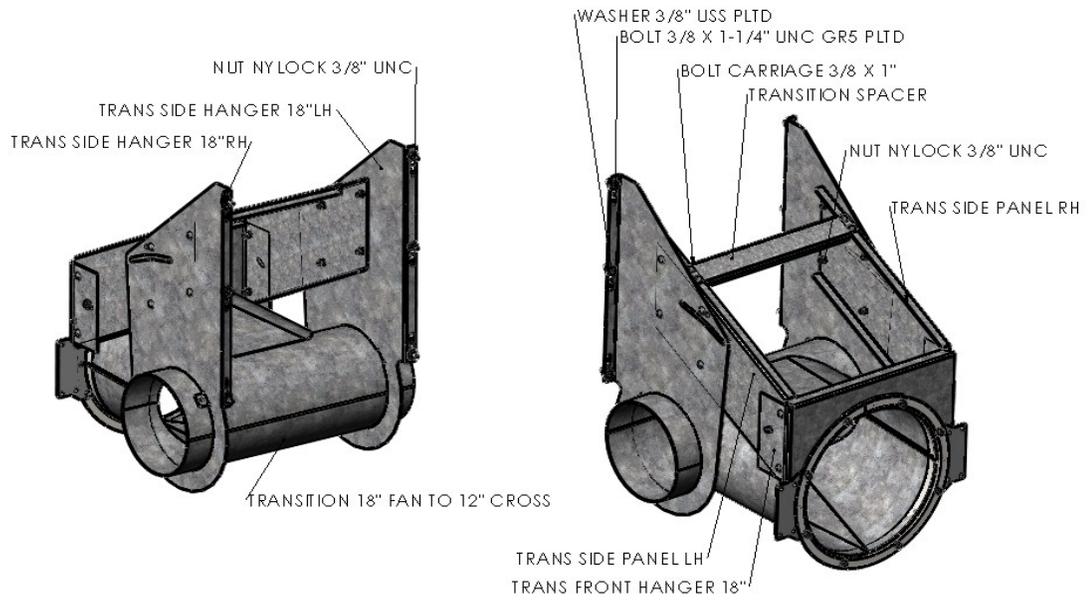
Flat Bottom Fan Transition Assembly
